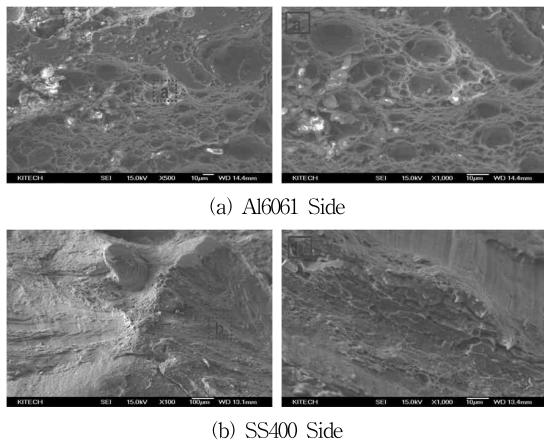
Fractured specimens after tensile test for the LAFSW welded joints
